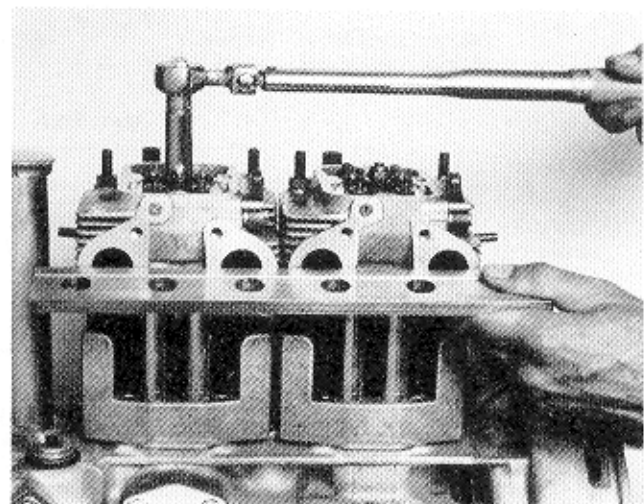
Checking the Manifold Alignment AC2 Engines
